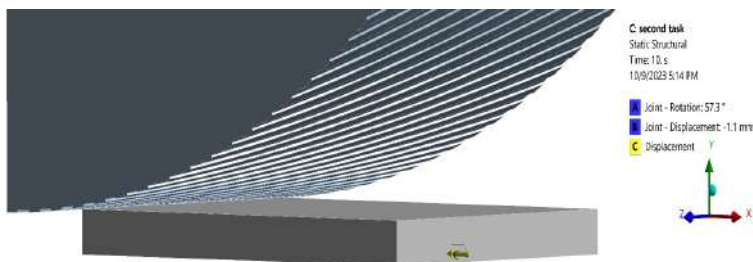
A roller's surface with notches for profiling the rolled steel for discreteness achieving
